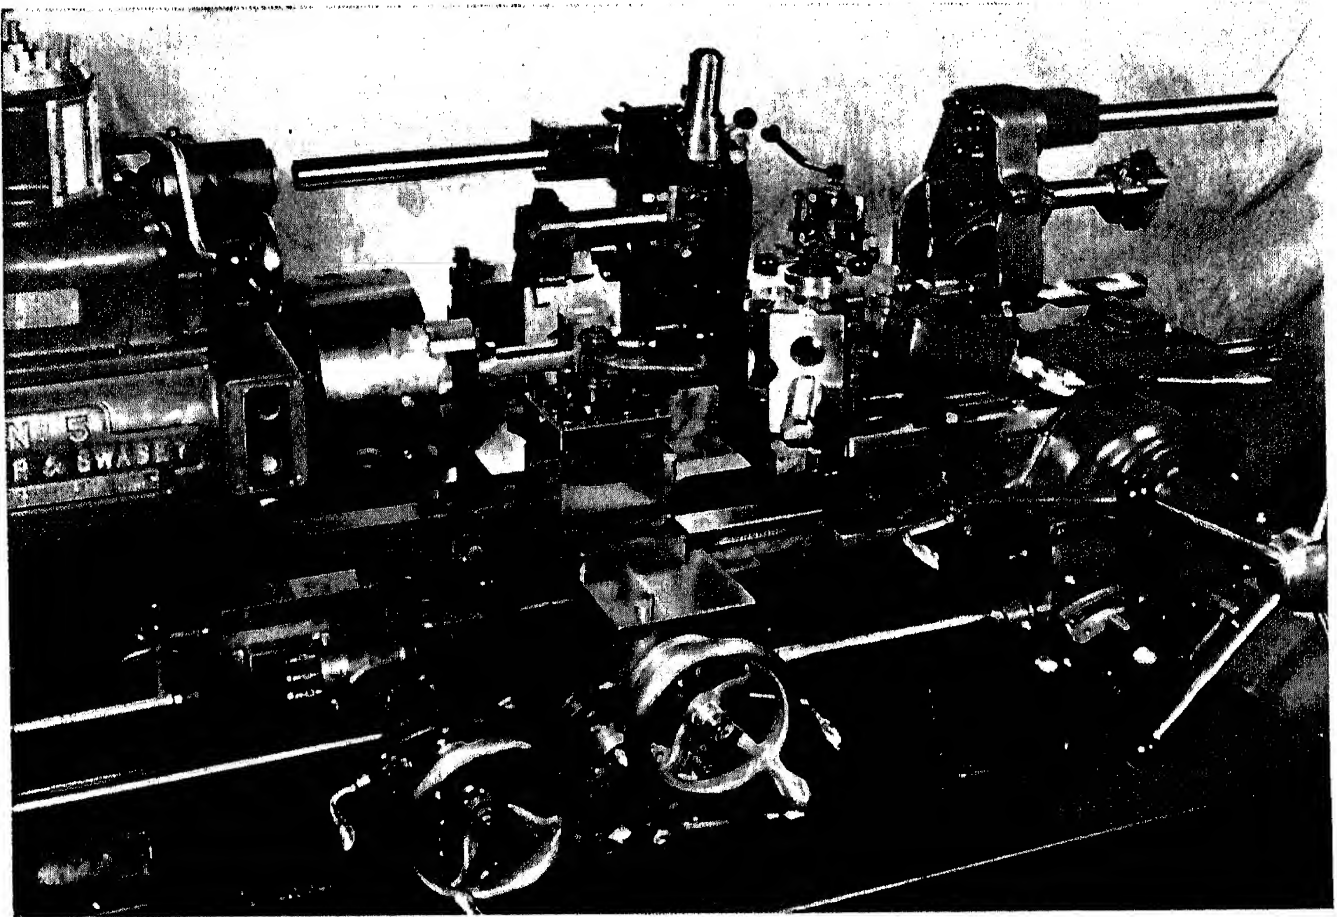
A chucking tool set up. (Courtesy The Warner and Swasey Co.)
